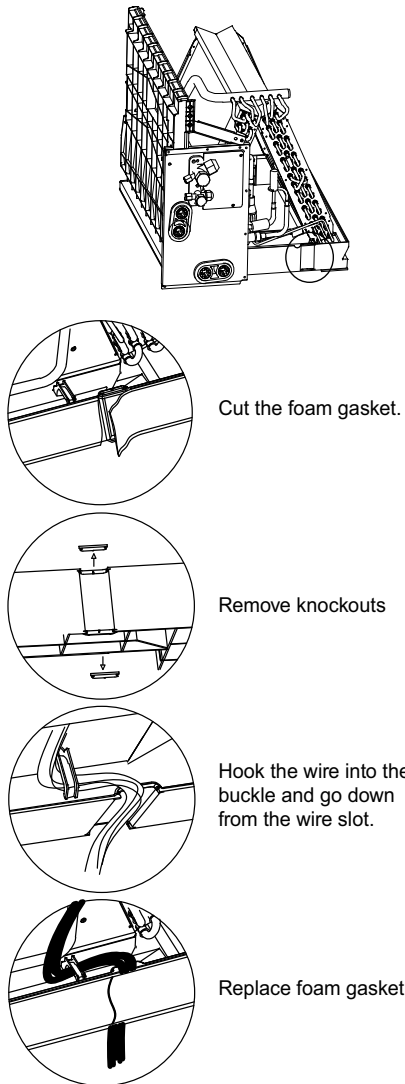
Reinstall Sensor Plugs and Electronic Expansion Valve
